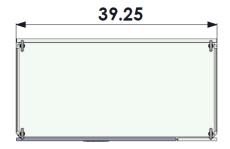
S3534BR D82 Cabinet Dimensional Outline
